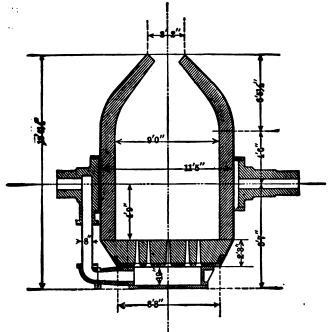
FIG. VI-A.—BESSEMER CONVERTER IN UPRIGHT POSITION.
